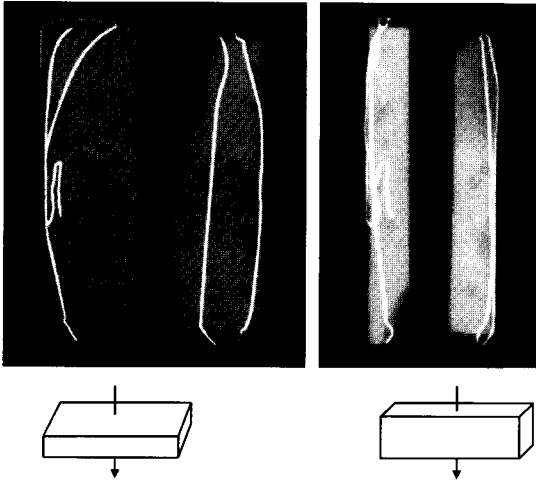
X-ray shows  $\varnothing 0.1$  mm double platinum wire after pressing.(staining technique)
